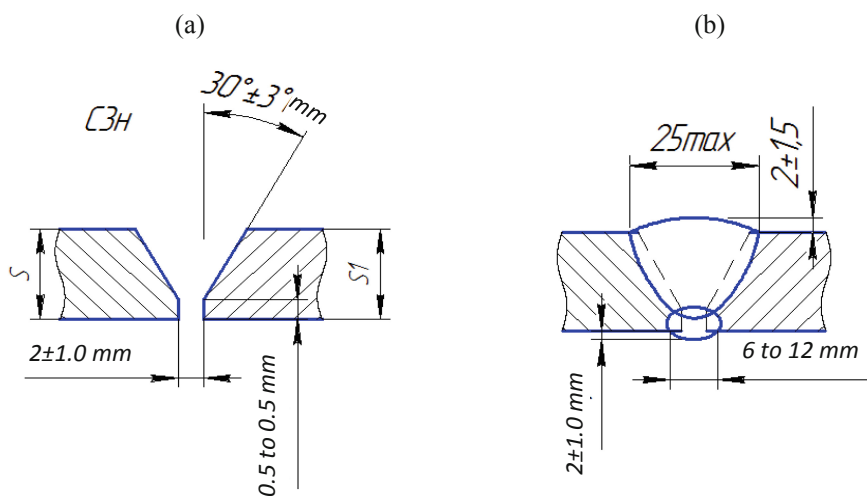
Weld size before welding (a) and after welding (b). *Source:* STO 00220368 – 008 – 2006.
